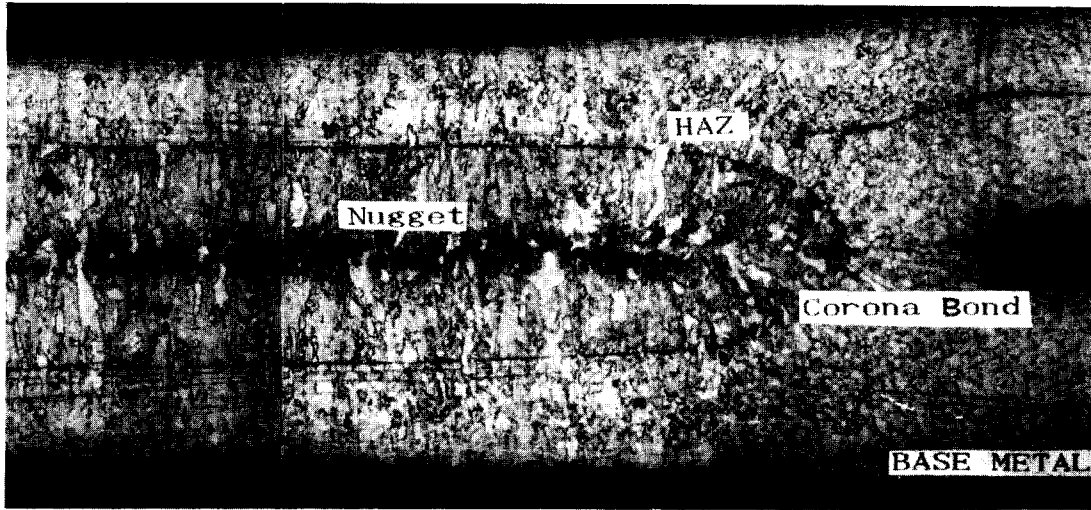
Cross section of welding zone in high strength steel sheet. 15cycle, 11KA(×50)
